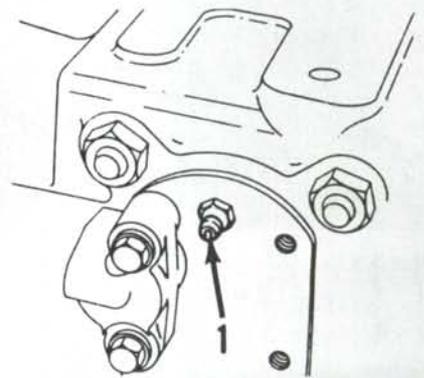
On all models except 1594 and 1690, air bleed fitting (1) is located on rockshaft cylinder.
